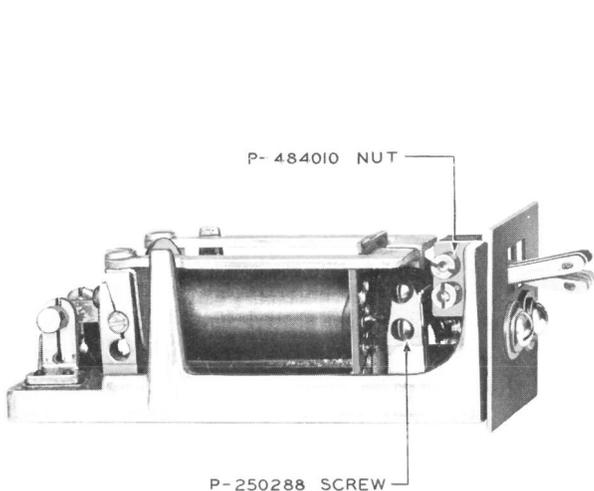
280-Type Relay - Side View With Shell and Cover Cap Removed
